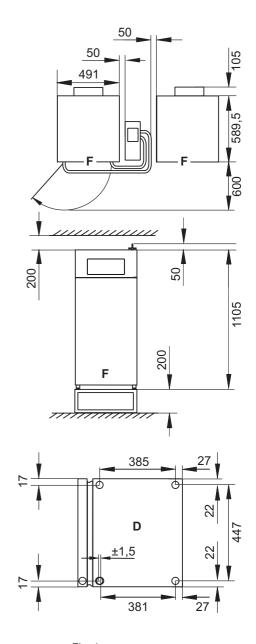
, Device dimensions and minimal distances, values in mm, F = Front
